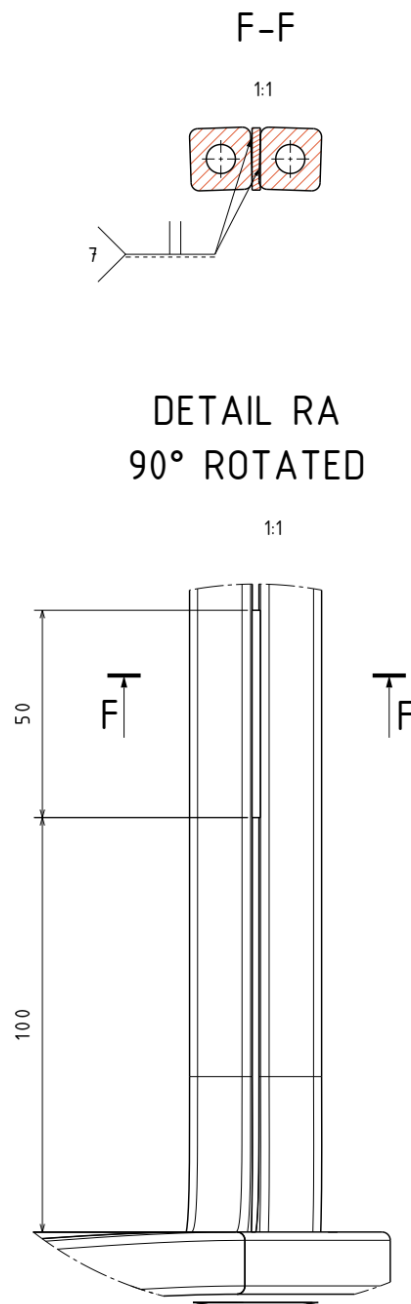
Example of the area to be soldered (excerpt from the drawing, 50 mm to be soldered).
